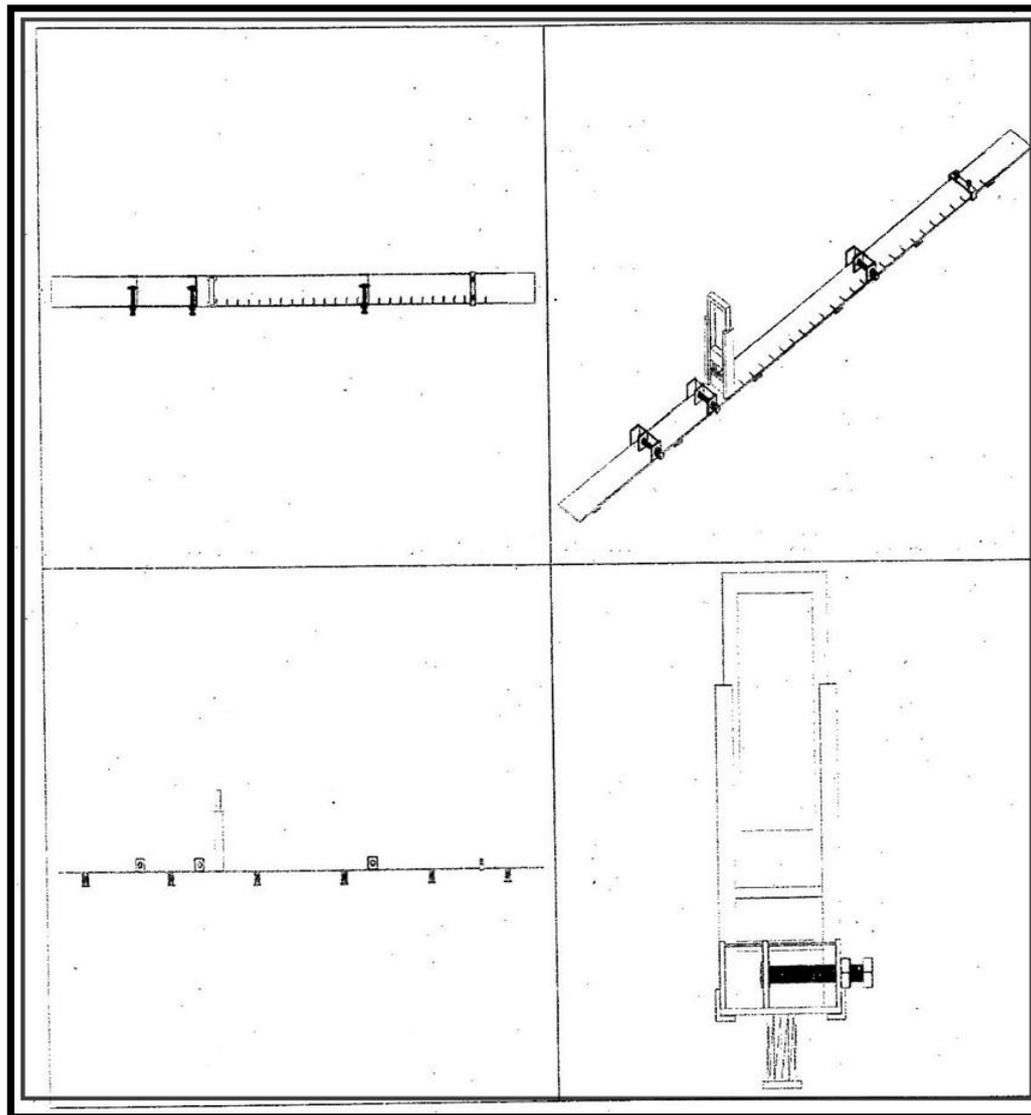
Front View, Top View, Side View of Modified Cutting Machine
